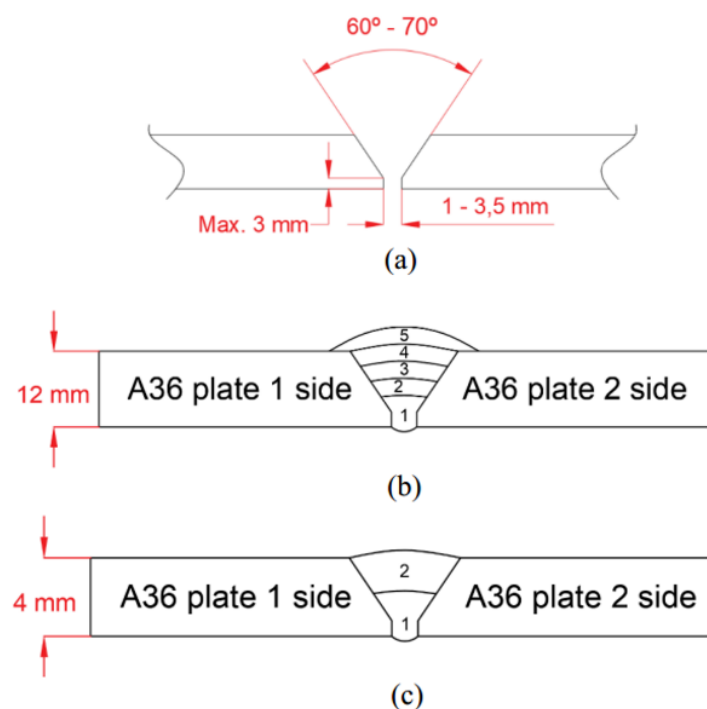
Schematic of welding process (a) Bevel design, (b) Five layers, and (c) Two layers
